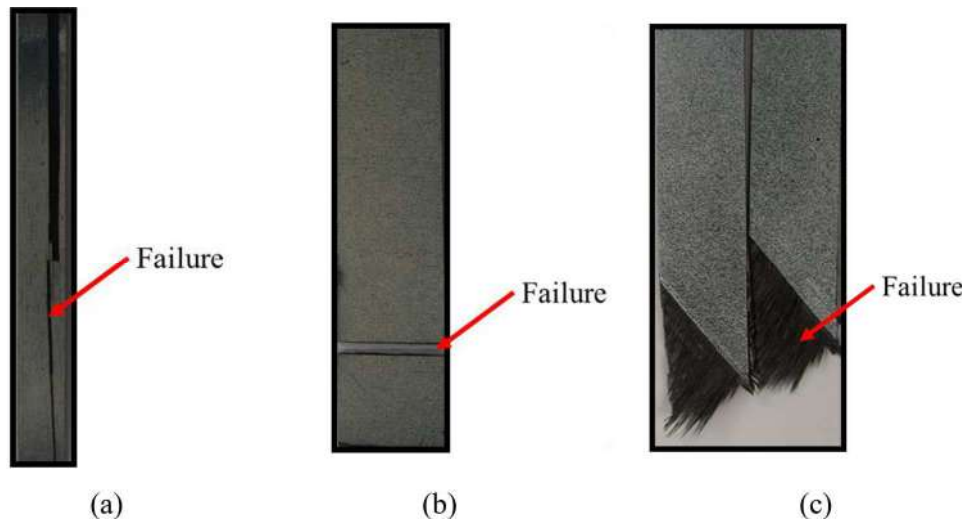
(a) 0° tensile test, (b) 90° tensile test and (c) shear test after failure.
